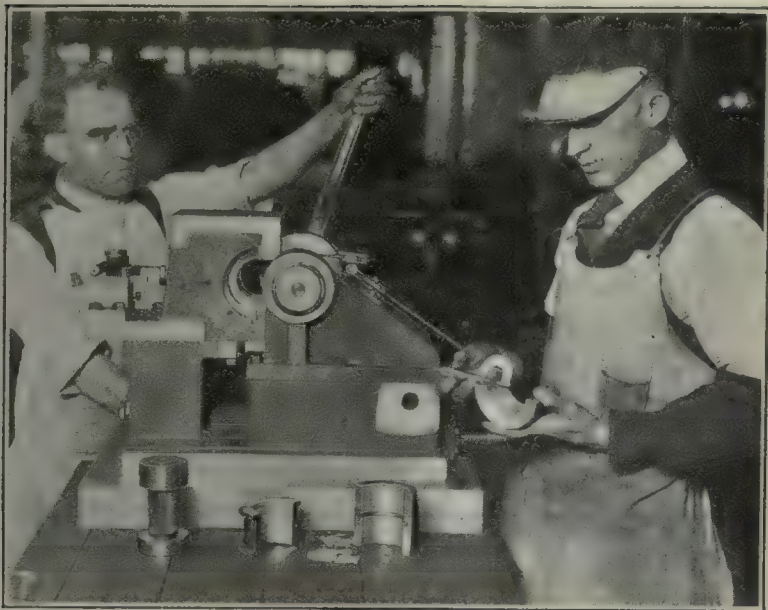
FINISHING THE BEARING SURFACE IN A SPECIAL SHAVING MACHINE. FIG. 8. ANOTHER VIEW OF THE SHAVING MACHINE
